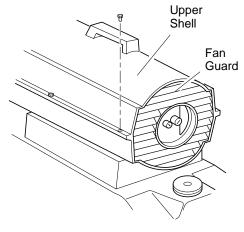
Upper Shell Removal, 20,5 kW (70,000 Btu/Hr) Model
